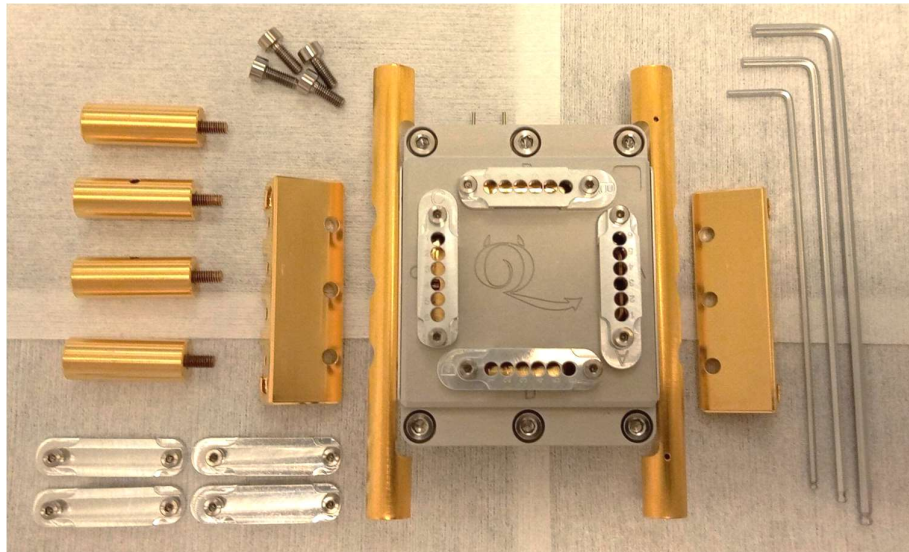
Main assembly with rods, brackets, connector cover plates, screws, and tooling.
